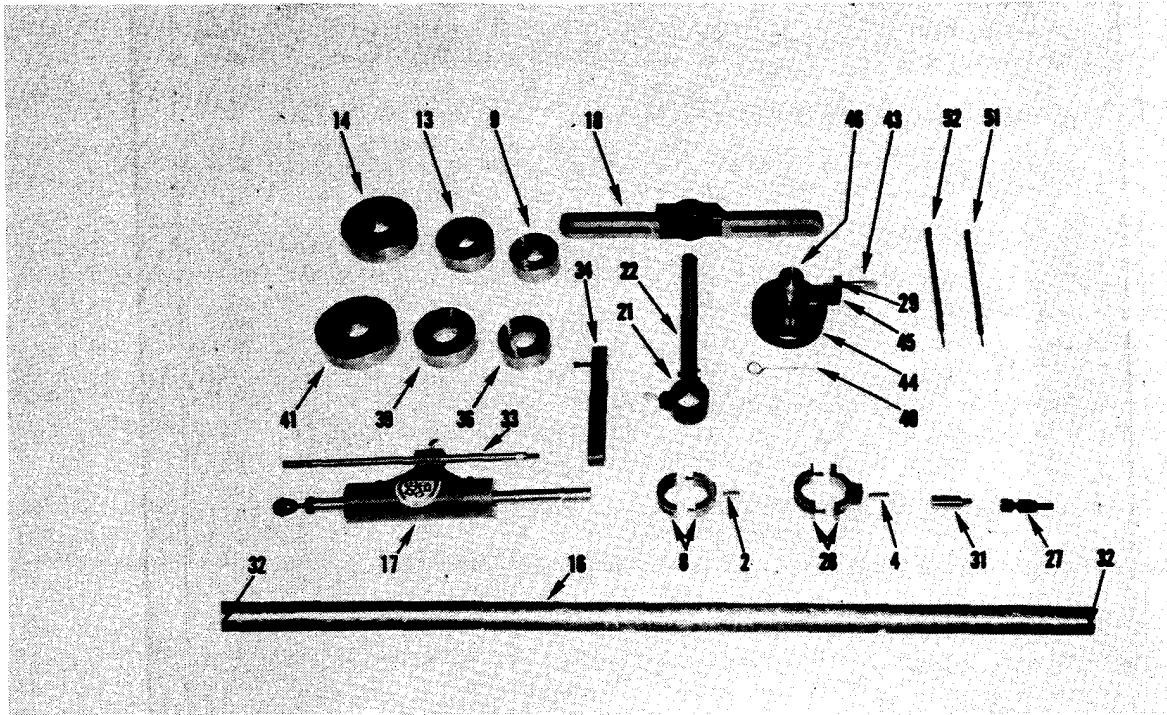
, (ST-1177). Exploded view of ST-1177 Boring
